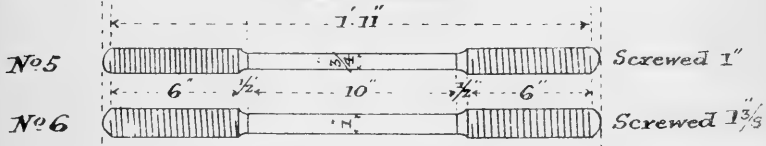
DETAILS OF TEST BARS TO SUIT UNIVERSITY TESTING MACHINE.
